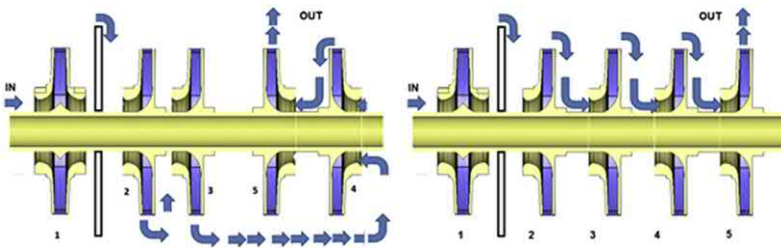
Hybrid Multistage rotors, with double entry first stage impellers.
